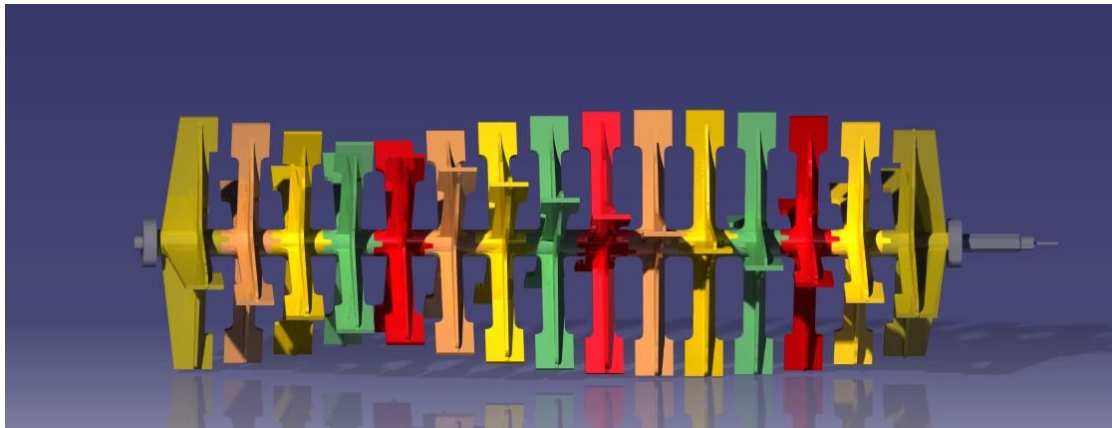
3D rendered image of Drive shaft fitted with rotor and bearing.
